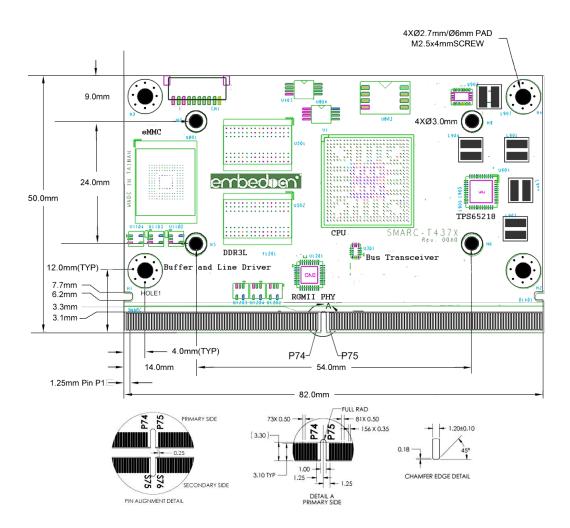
SMARC-T4378 Mechanical Drawings (Top View)
